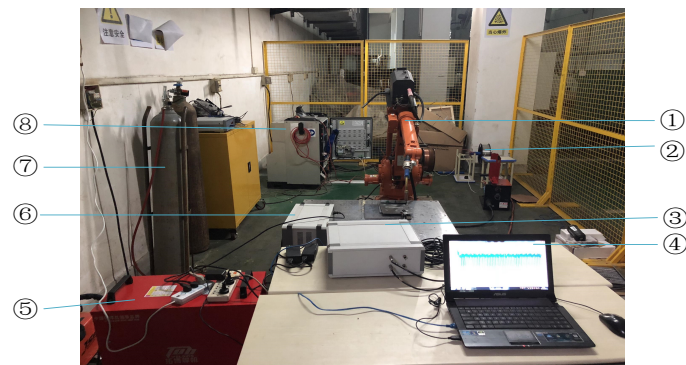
MIG welding experiment and test platform with (1) welding robot (2) wire feeder (3) arc signal data acquisition box (4) computer (5) welding machine (6) arc sensor box (7) argon gas storage tank 8) power supply
